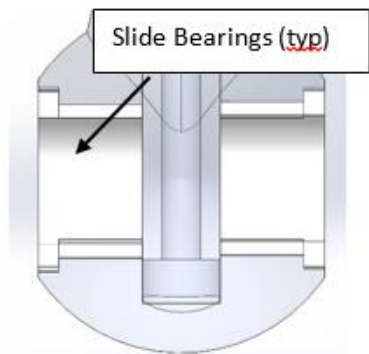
A cross sectional view of the original hydrofoil/drive train pod showing the location for the slide bearing
